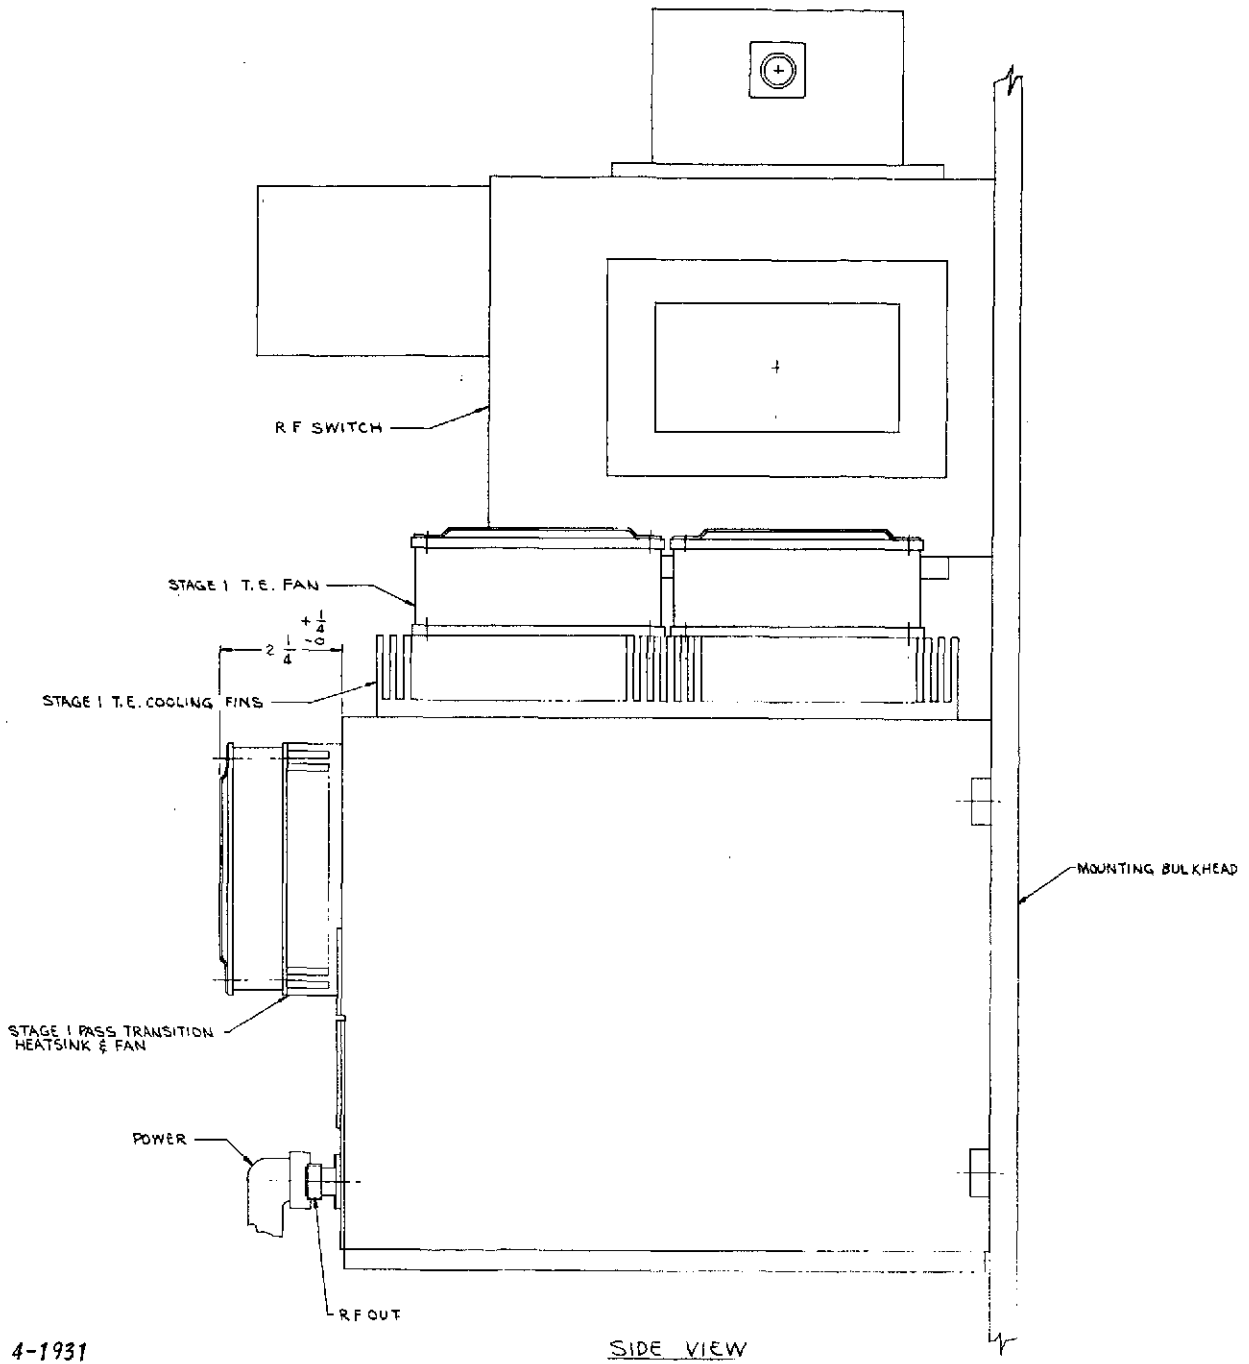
Paramp Module, Site Interface Outline (Sheet 3 of 3)
